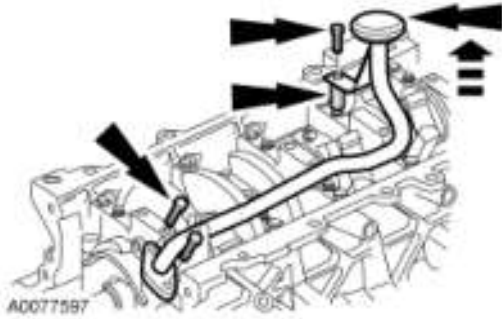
Identifying Oil Pump Screen And Pickup Tube And Spacer
